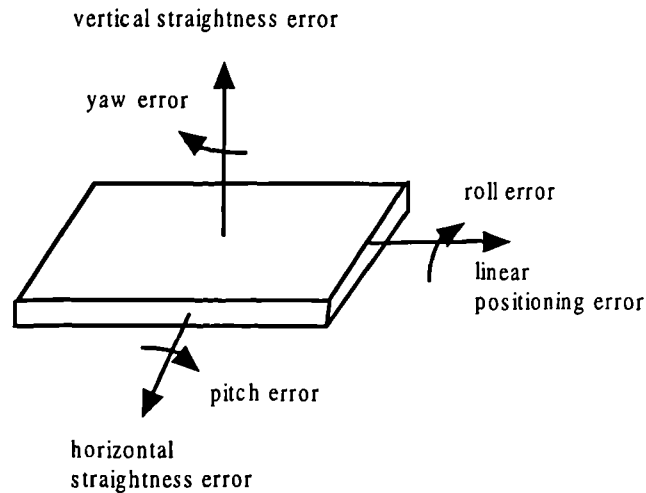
1. Geometric sources of error for a single axis of a machine tool
